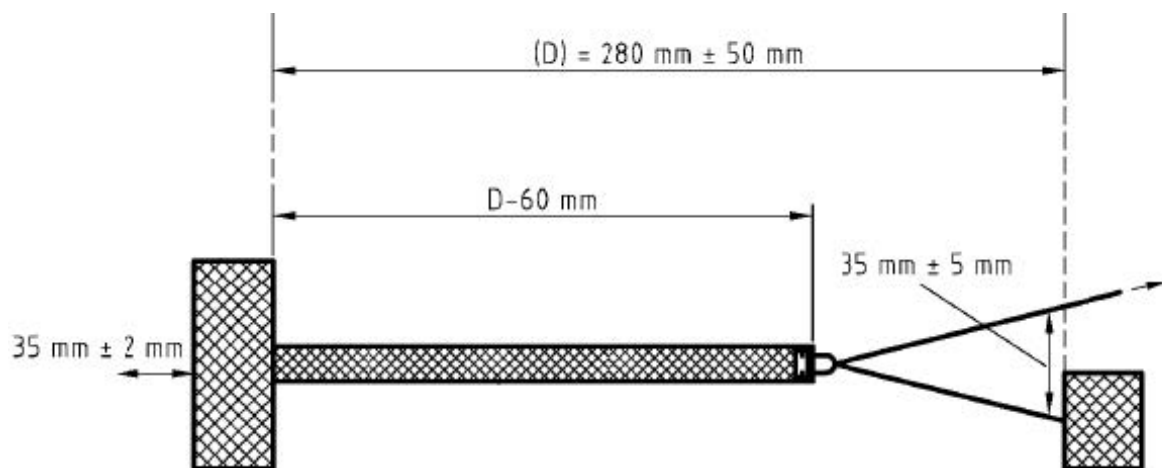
SCHEMATIC DIAGRAM OF TESTING MACHINE
